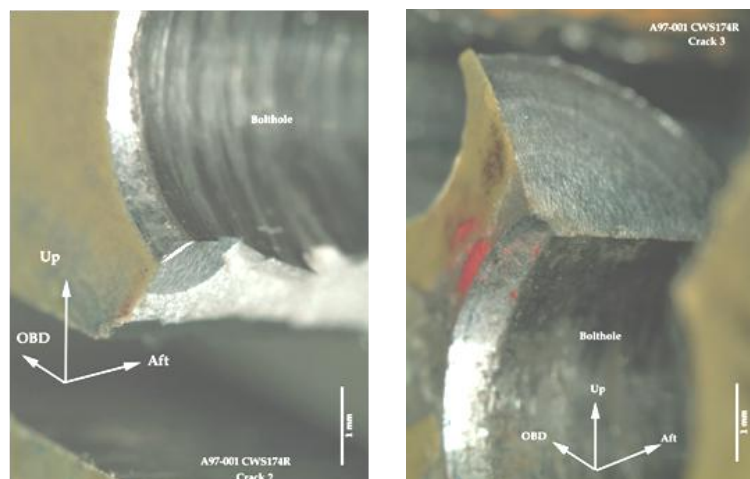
Fracture Surface of Crack 2 (left) and Crack 3 (right) after breaking open. Cracks grew from the chamfer
